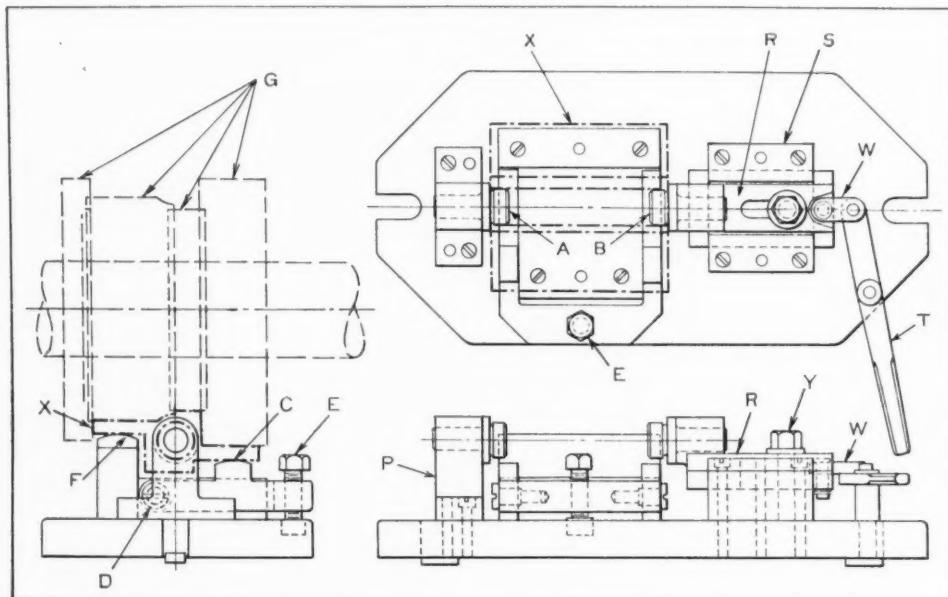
Finish-milling Fixture Used for Final Operations on Two Sides of Work
